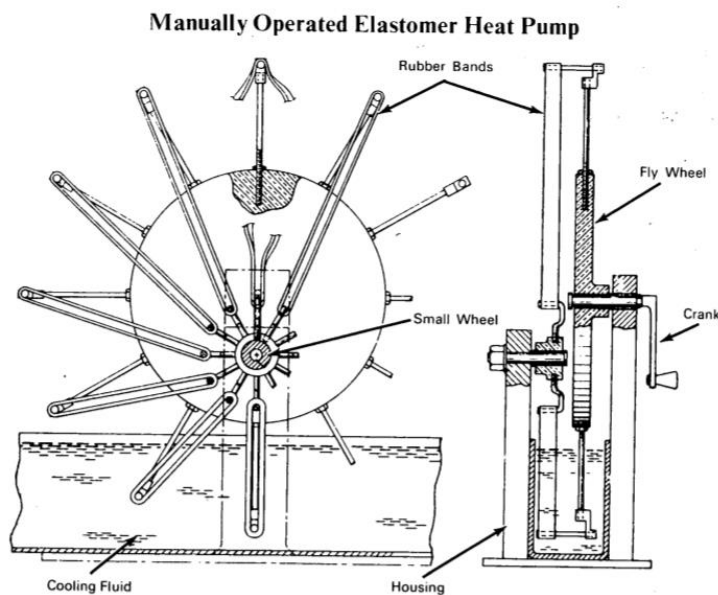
Cooling system with elastomer strips depicted in side view (left) and top view (right) [10].
